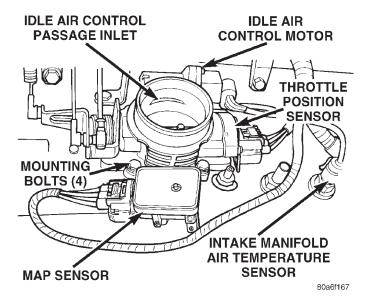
Throttle Body Sensor Locations—4.0LEngine
